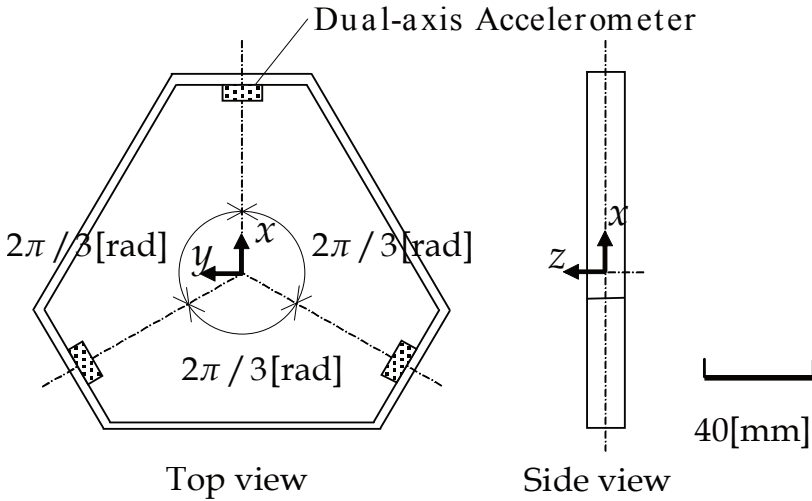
Outline drawing of a prototype 6-DOF accelerometer
